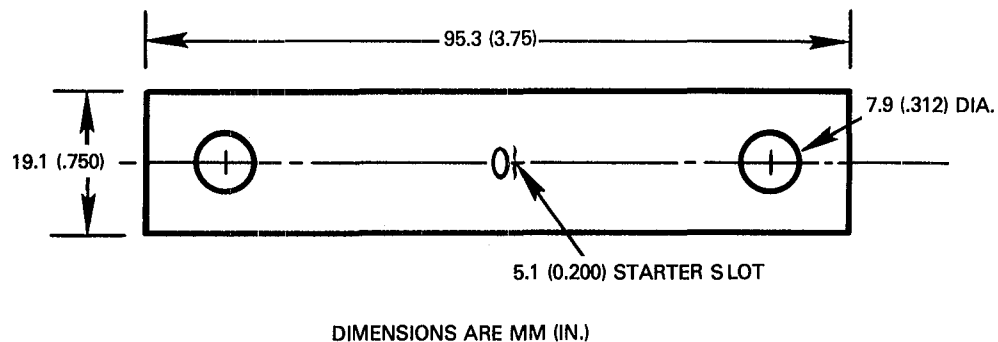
Center Notched Specimen Used to Measure Fatigue Crack Propagation Rate
